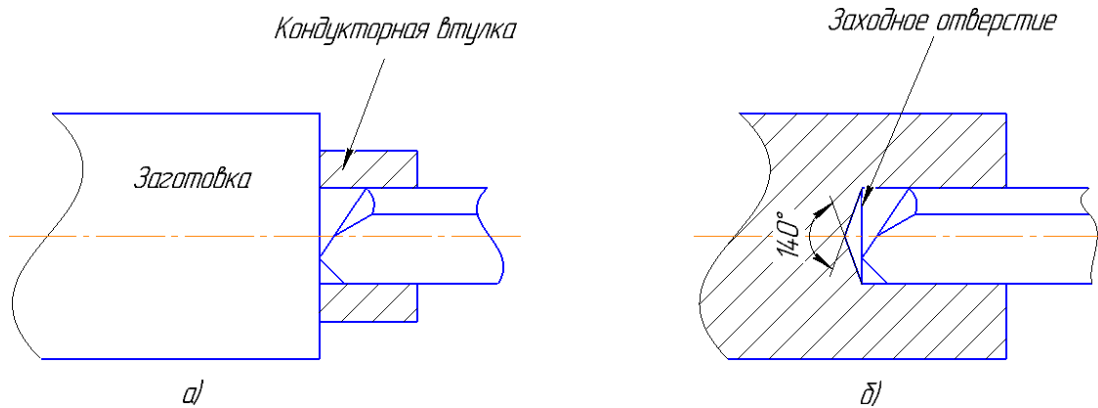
Methods of cutting in gun drills: a) using a conductor bush; B) using the inlet
